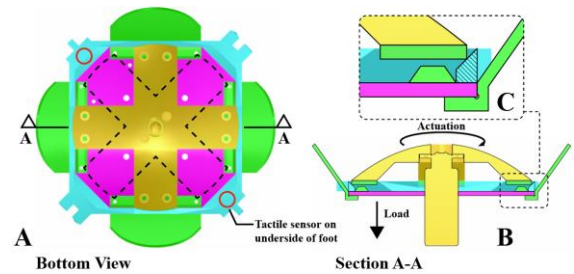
Gripping end effector. A) Bottom view of voxel face, shown in blue. Ungripped key position is shown in dashed lines, allowing entry/exit to/from a voxel. B) Section view of key in gripped position, C) Magnified view showing passive and active constraints engaging with voxel feature.
